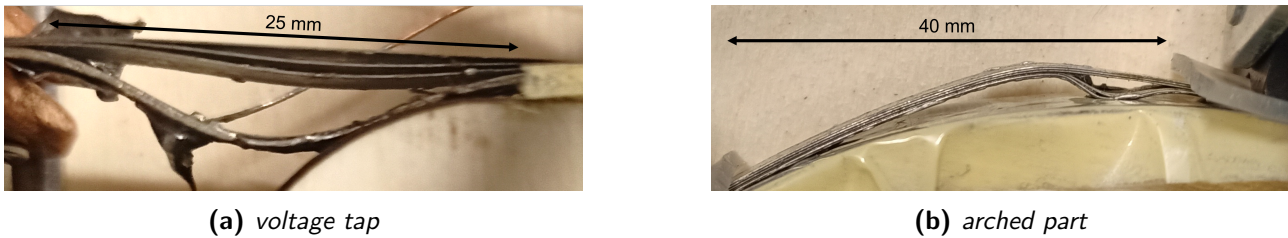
Visible damage to 5-tape stack after bending the cable at a radius of 50 mm.
